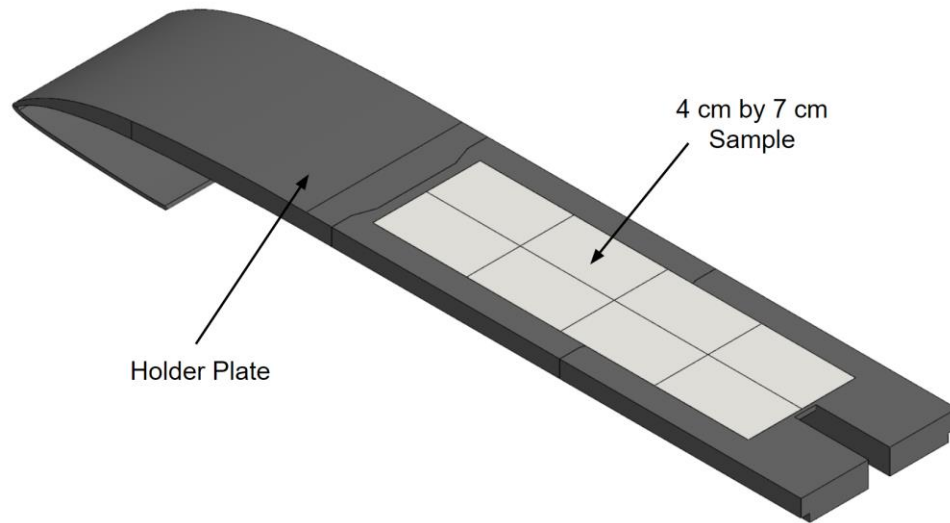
CAD model of holder plate with eight 4 cm by 7 cm samples inserted into its recess.
